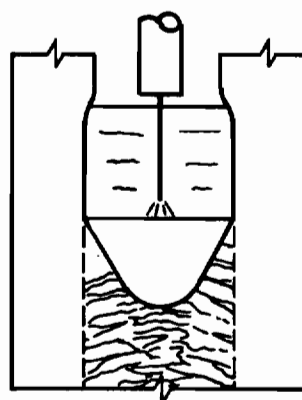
SCHEMATIC REPRESENTATION OF THE CONSUMABLE GUIDE ELECTROSLAG WELDING PROCESS EQUIPMENT.
